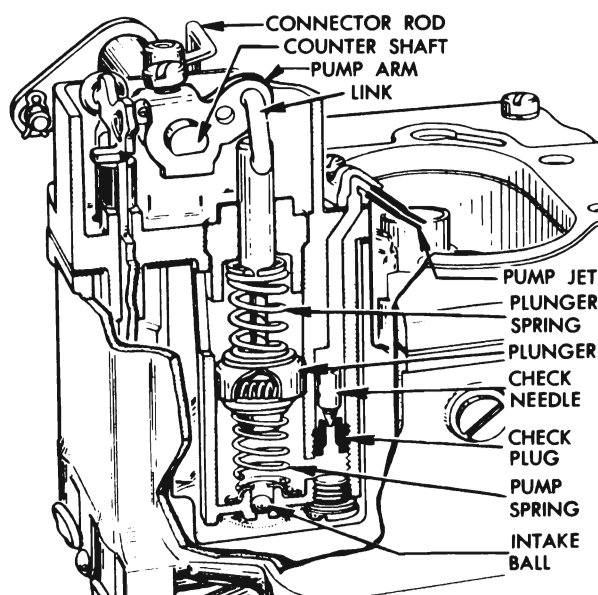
Accelerating System—664S Carter Carburetor (Series 70)
